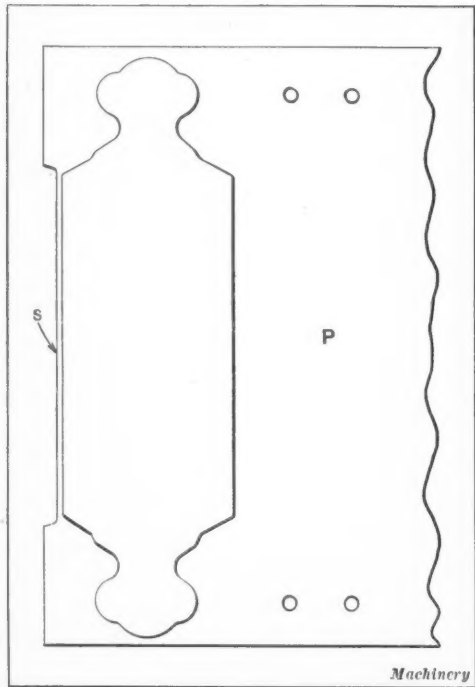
Blanking Strip after Second Stroke, illustrating Manner of gaging
